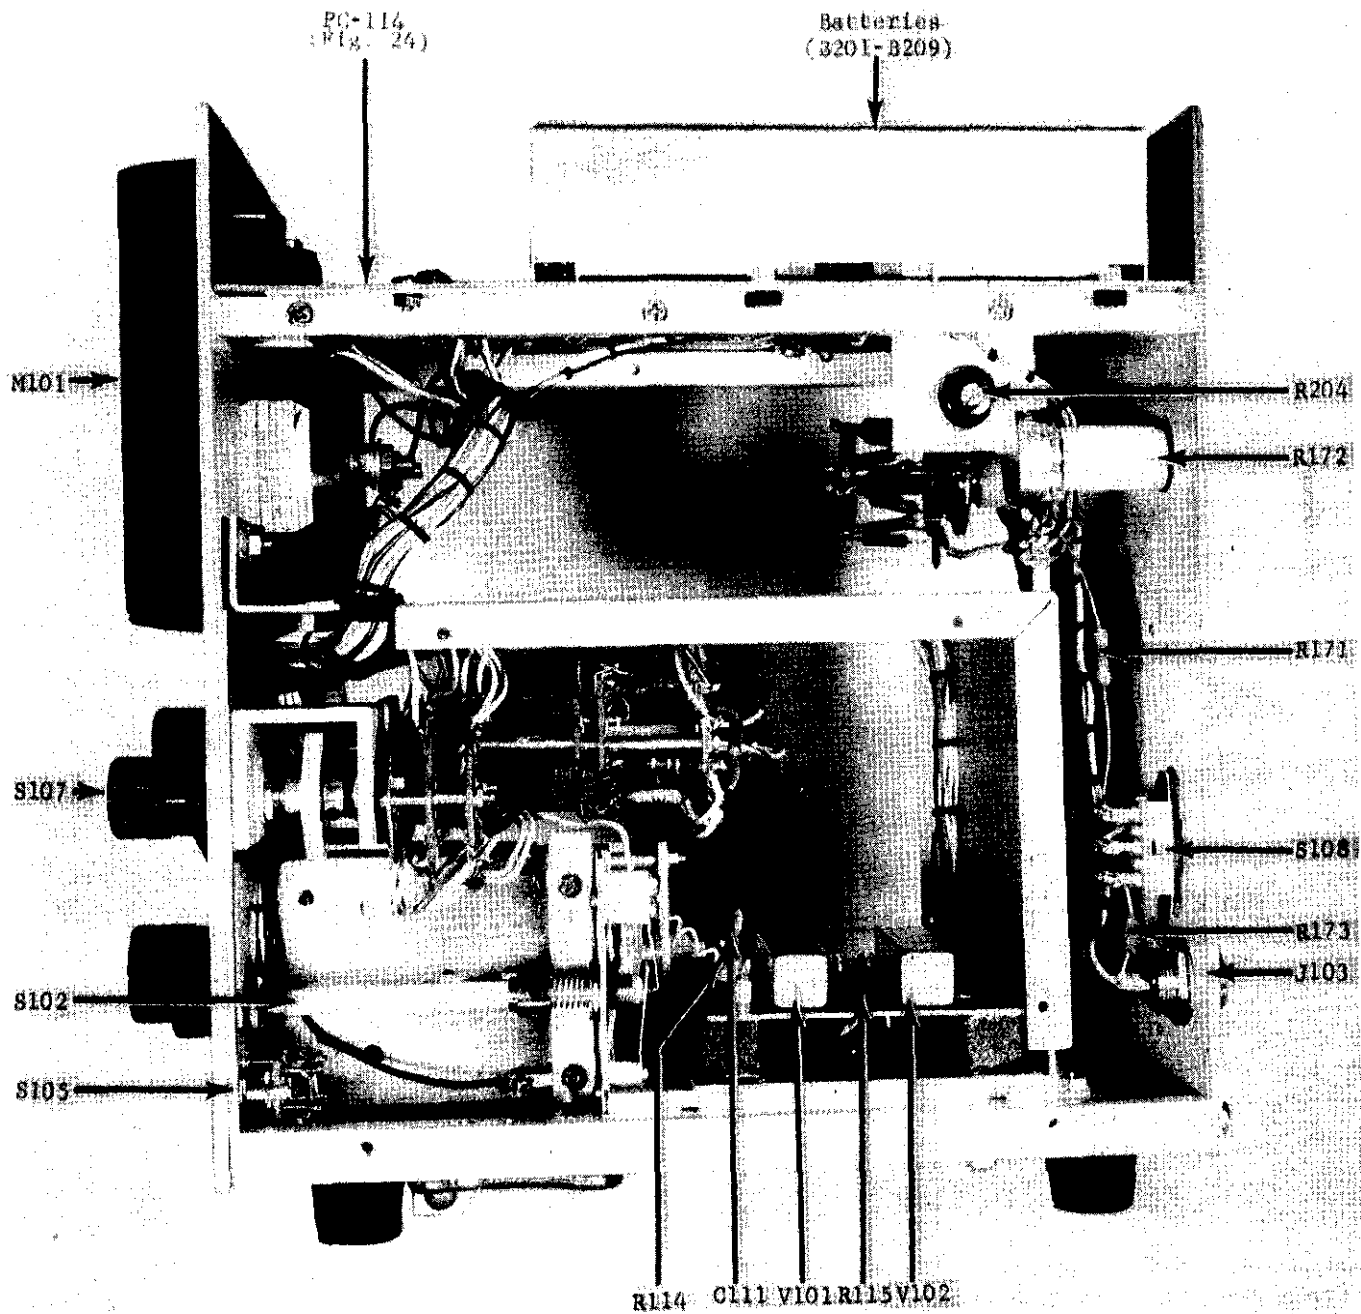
Side View of Model 601 Chassis. Front panel faces left. Location of components, printed circuits and switches is shown. Refer to Parts List for circuit designations. Figure 22 shows the opposite side.
